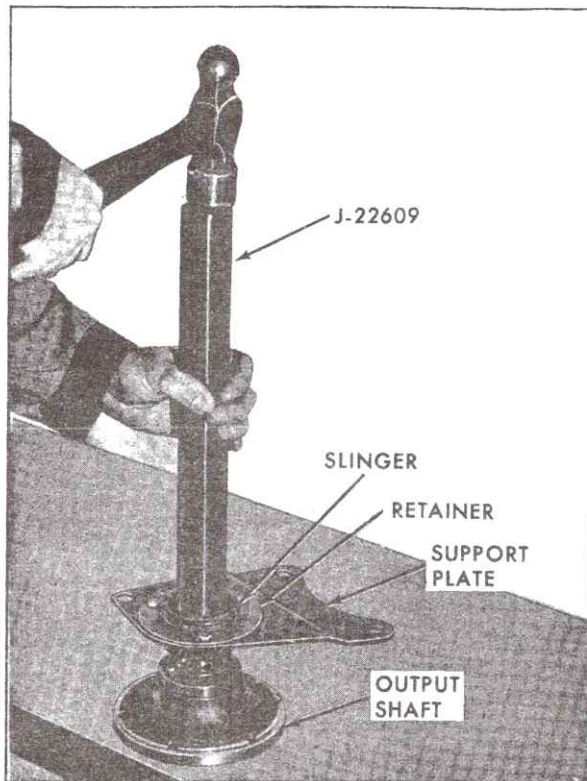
Installing Right Hand Output Shaft Support Slinger
